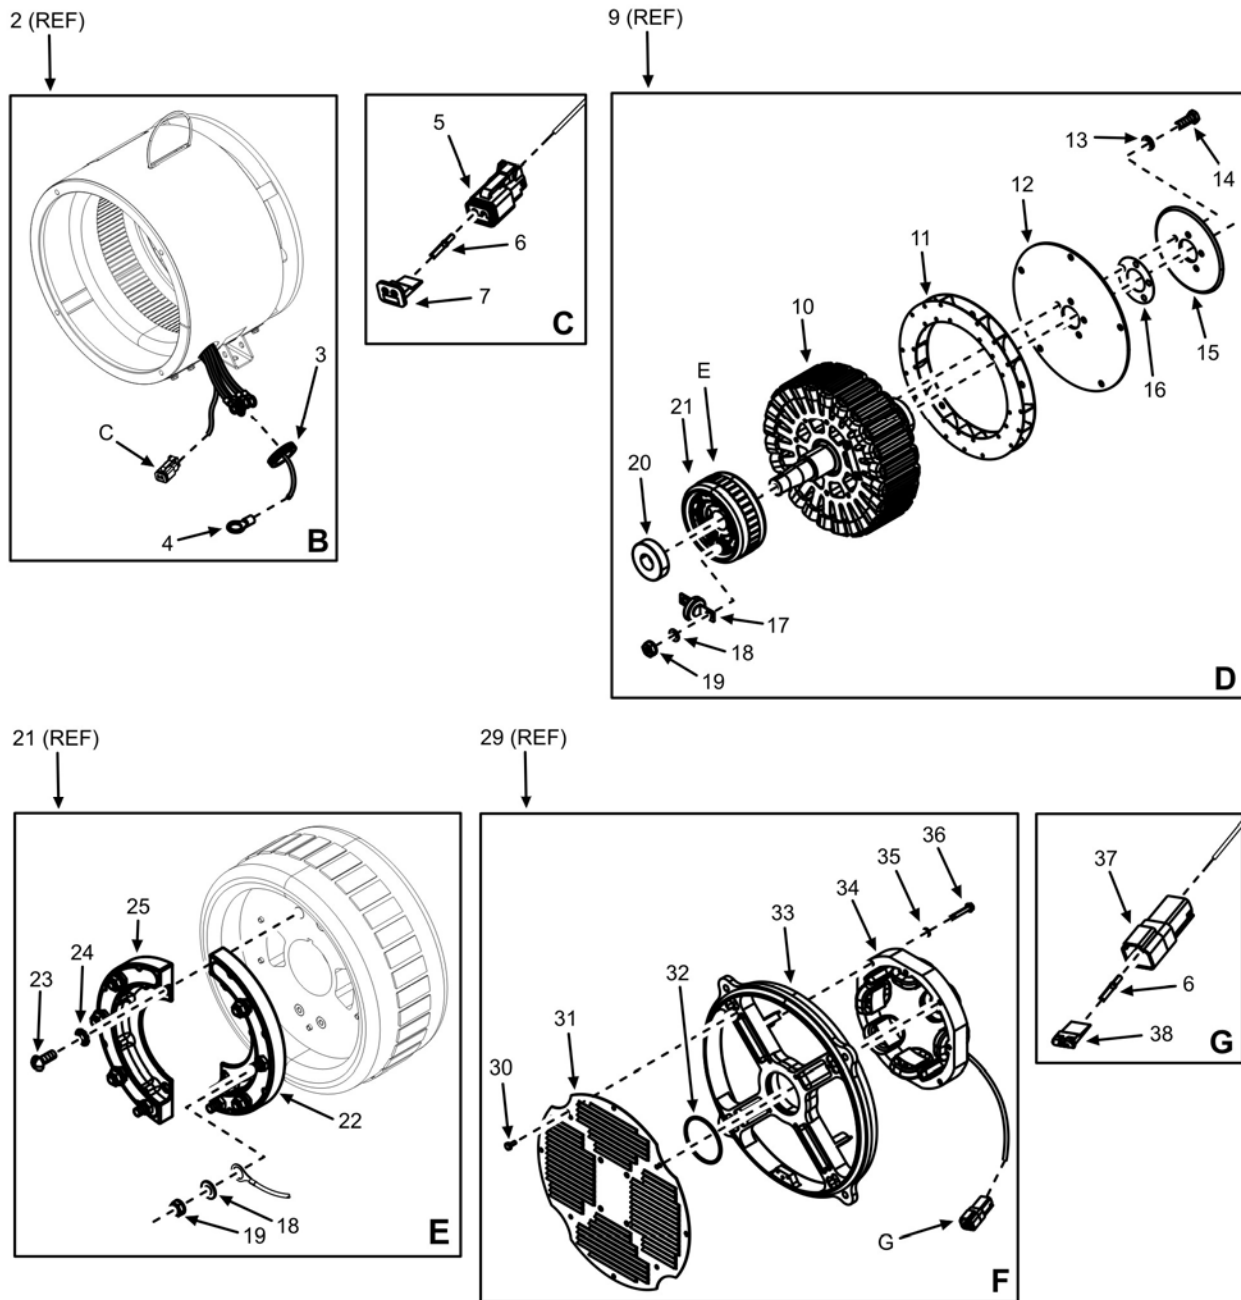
AC Generator Assembly, 400 Hz (Sheet 3 of 3).
